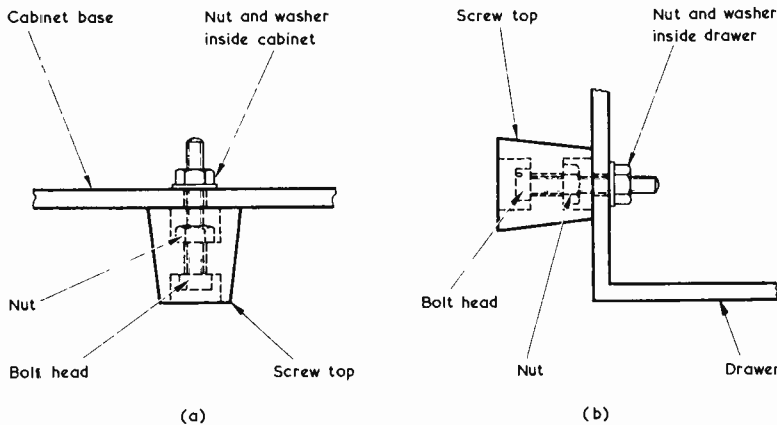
(a). Toothpaste tube screw tops with recesses in the head make excellent cabinet feet
